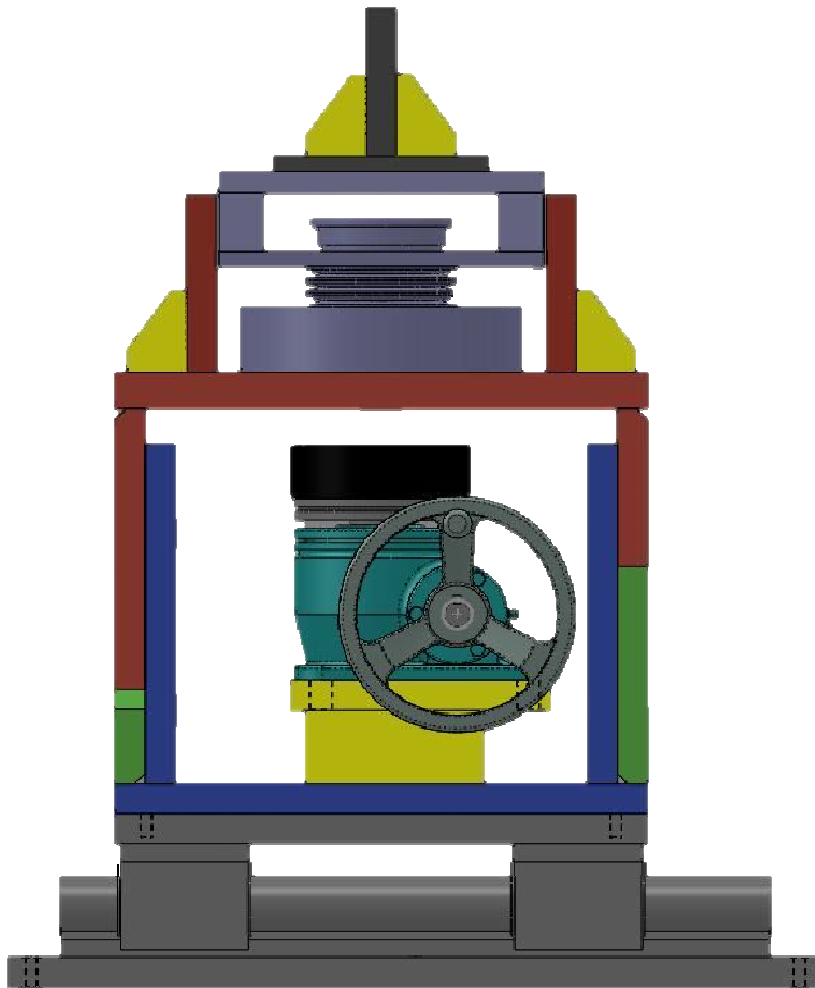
Side view of the final aft-mount design with the jack and load cell still in place.
